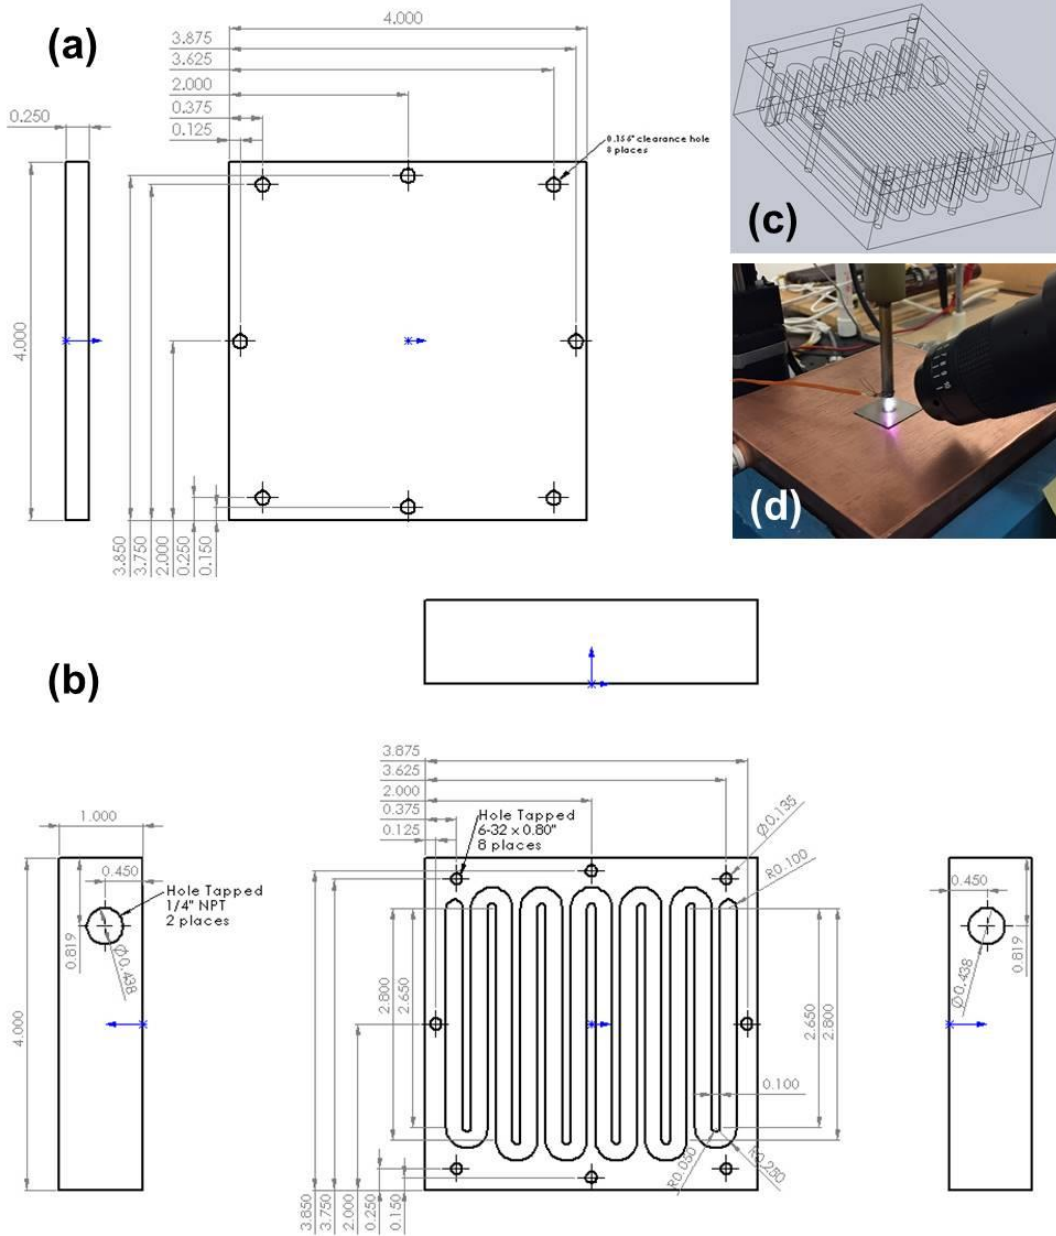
Cooling system is designed in (a) top view, (b) bottom view, (c) a 3D transparent view after putting the top and bottom together with a gasket, and (d) a photograph of using machined copper cooling box during the plasma discharge operation. The scale unit show on the schematics is inches. The parts demonstrated here were machined by the Dellamar Manufacturing Company in Belleville Michigan.
